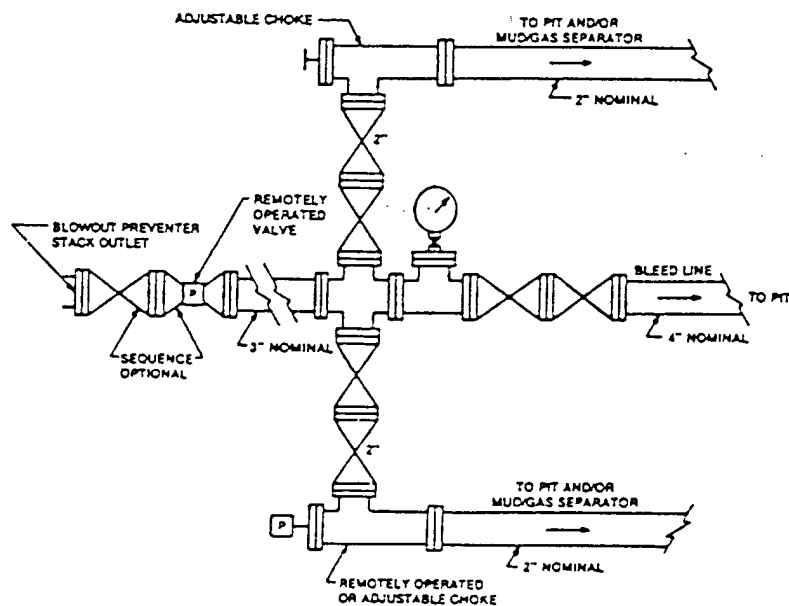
Typical choke manifold assembly for 5M rated working pressure service — surface installation.
